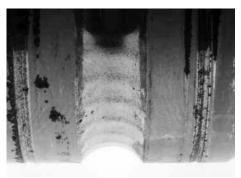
Note shock loading caused brinell damage on this ball bearing inner ring.
